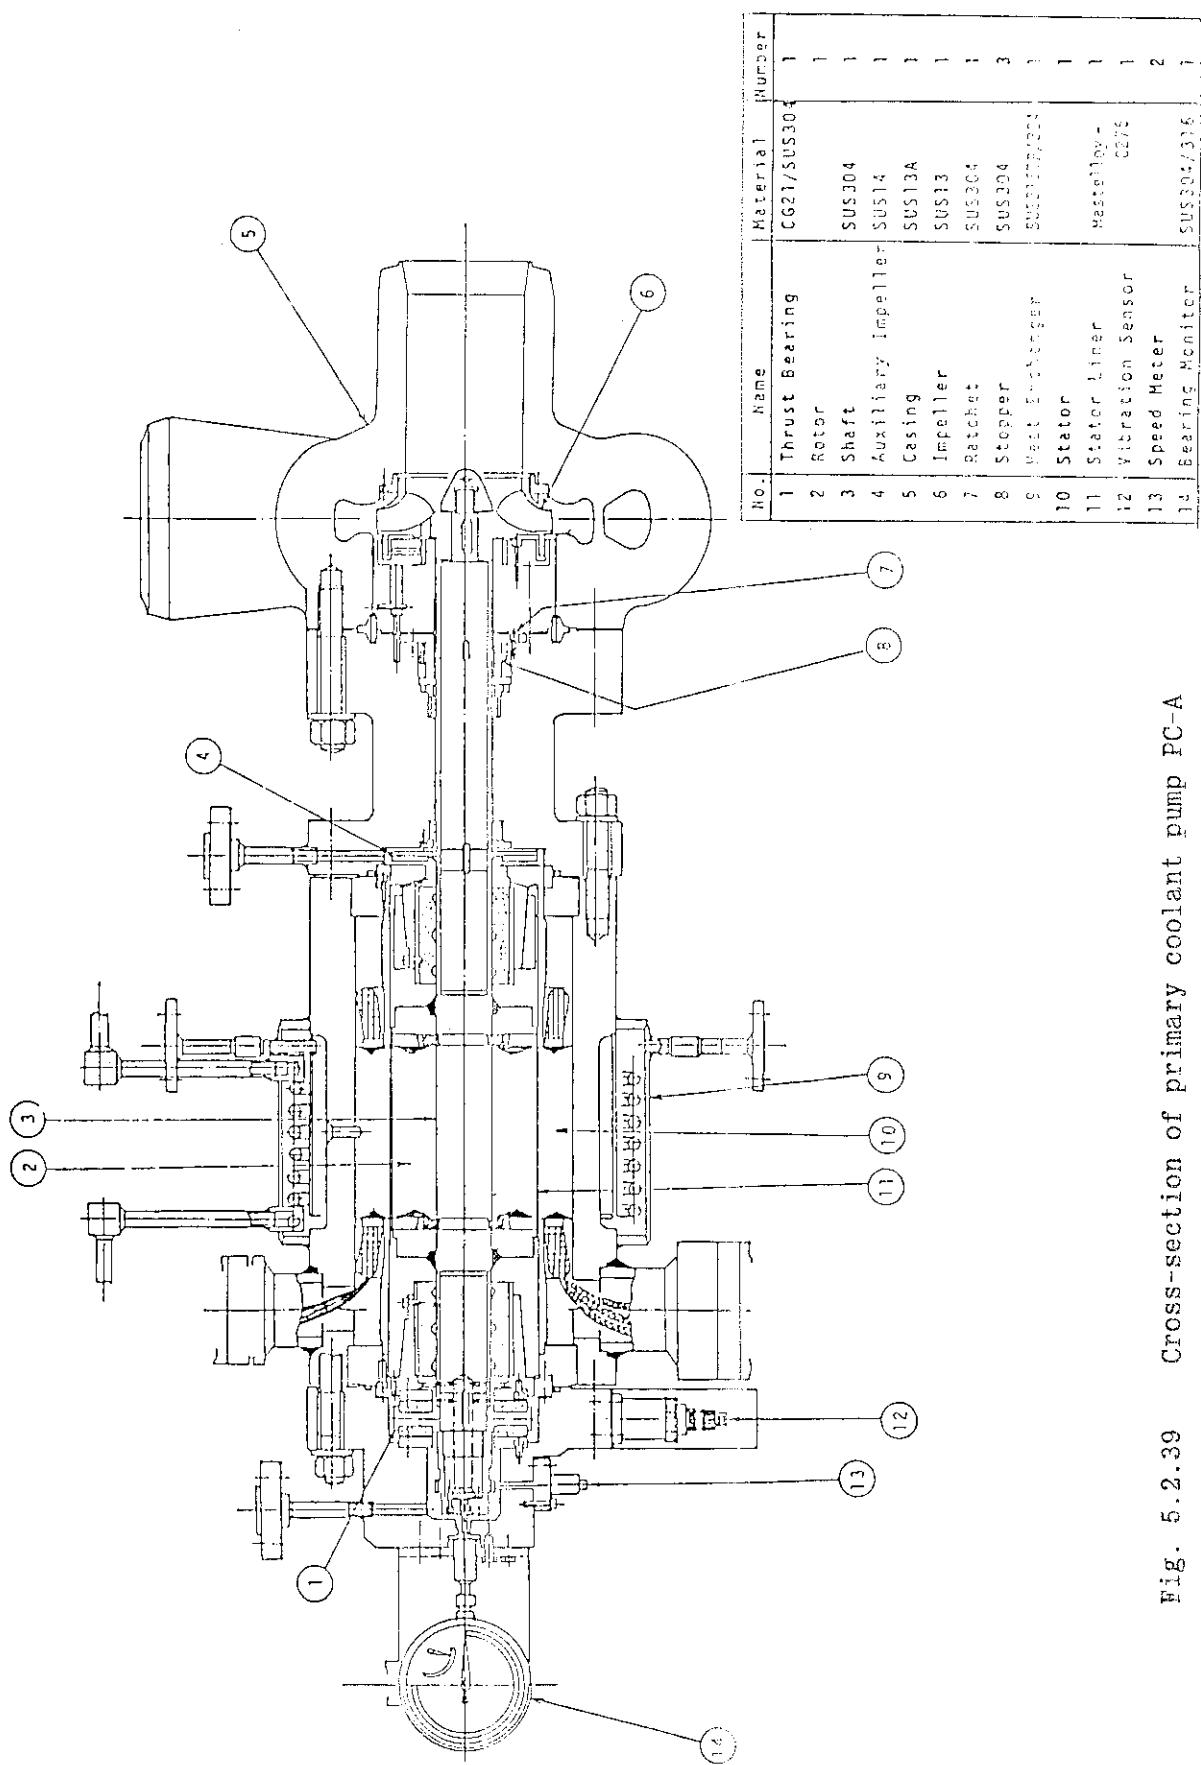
Cross-section of primary coolant pump PC-A
